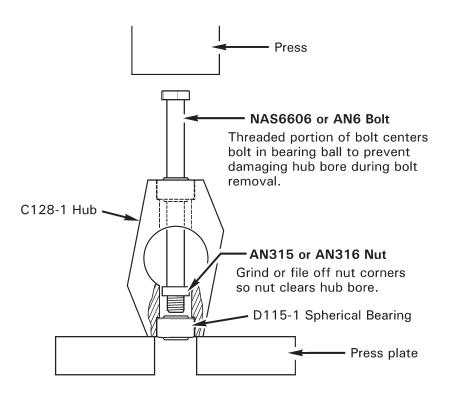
SPHERICAL BEARING REMOVAL
